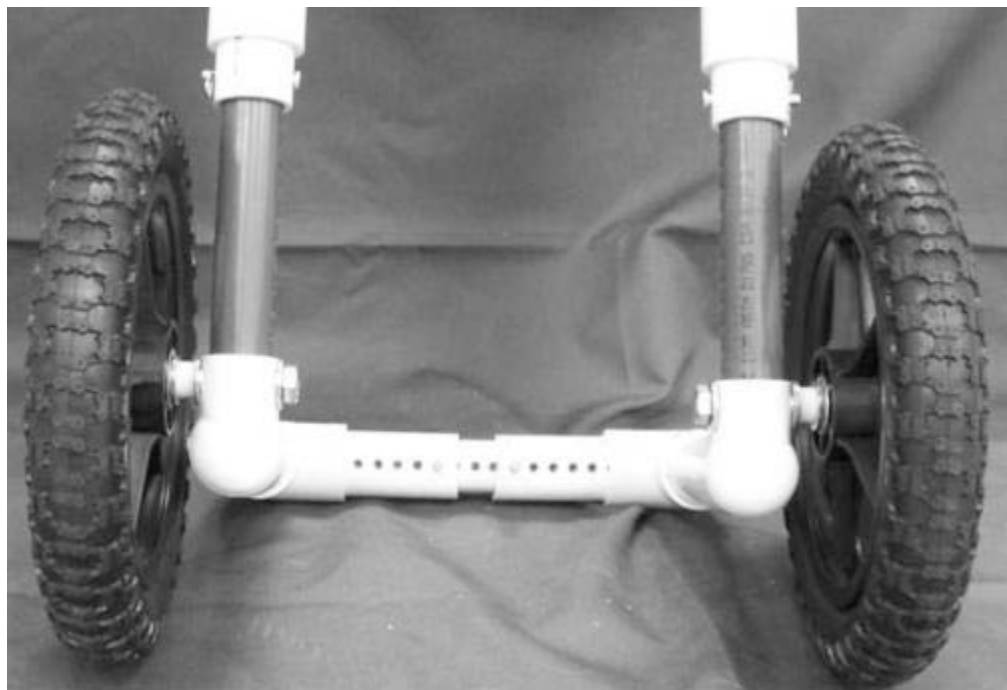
Lower Portion of Wheelchair Frame with Wheels Joined to Frame.
